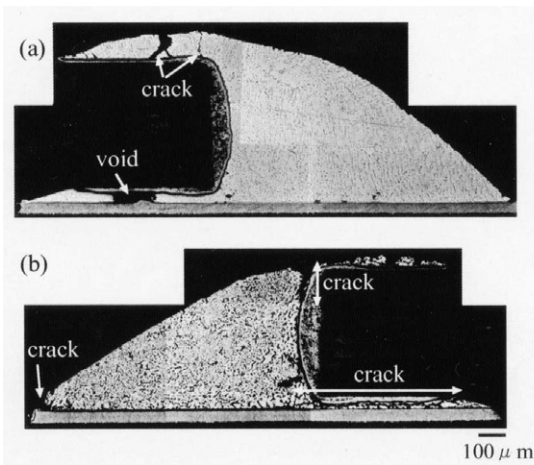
Optical micrographs of solder joint cross section for 4532 resistor after thermal cycling test to 3000 cycles at -30°C to 80°C; (a) new Sn-2.5Ag-3.0Bi-1.0In-0.2Cu solder, (b) Sn-37Pb.
